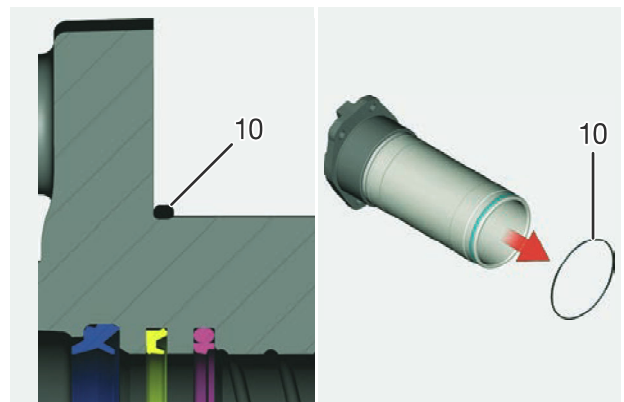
Remove the o-ring (10) from the guide sleeve (9).
